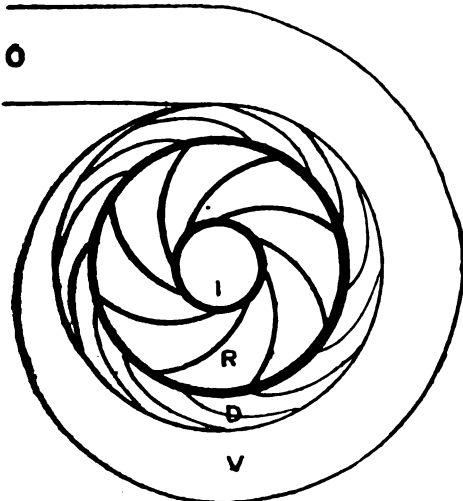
Sectional diagram of centrifugal pump. I, inlet; R, rotor; D, diffusing chamber; V, volute casing; O, outlet.
